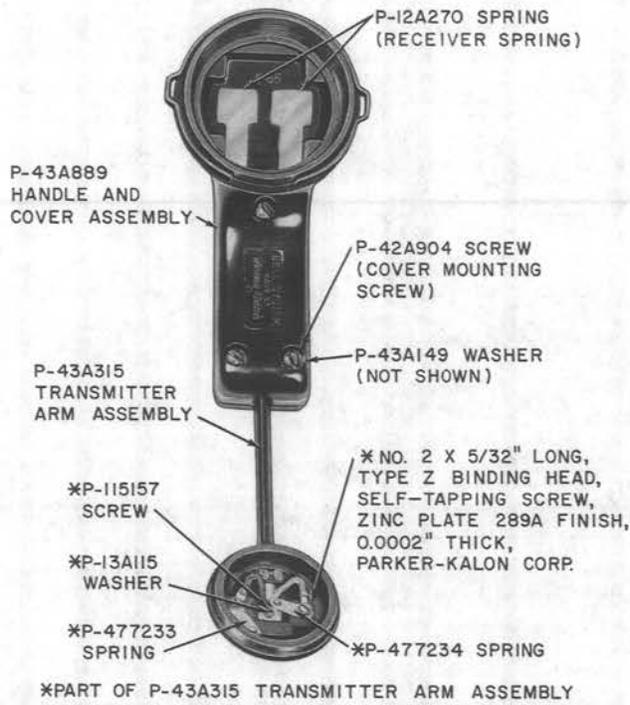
Handle, Cover, and Transmitter Arm Assembly With Receiver and Transmitter Units Removed (All 53-Type Head Telephone Sets Except 53R)
